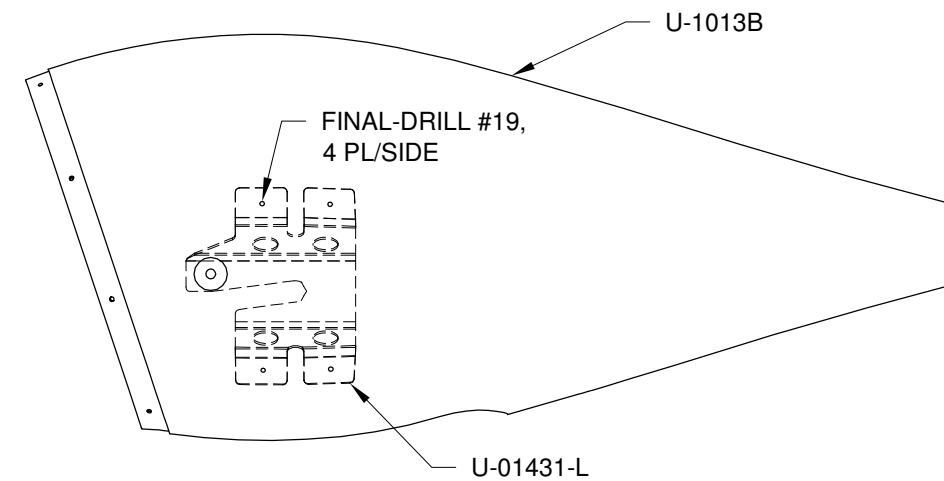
FINAL-DRILL WHEEL FAIRING TO BRACKETS
